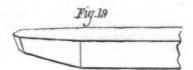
shows a front tool for brass, concerning which nothing requires to be said, except that it cannot be made too hard, and that the top face must have negative rake when the tool point is held far out from the tool post.
